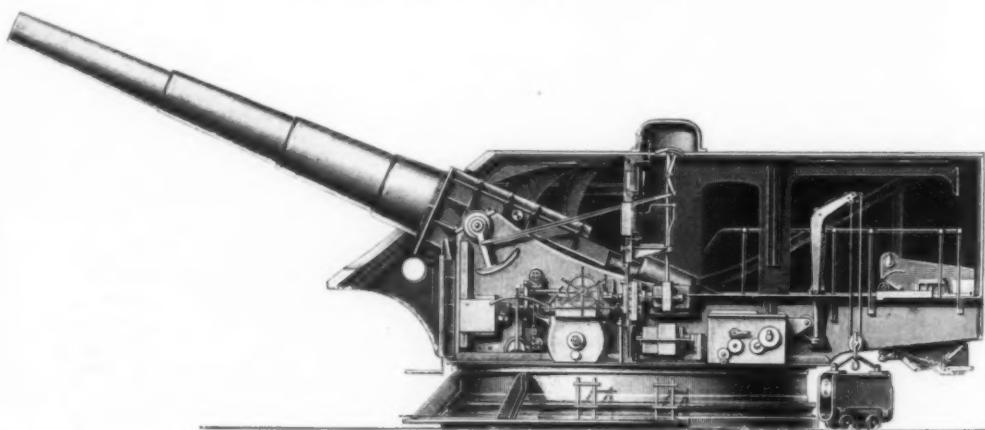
30.5-CM. GUN "L/40" MOUNTED IN CENTER-PIVOT COAST-DEFENSE CARRIAGE.
